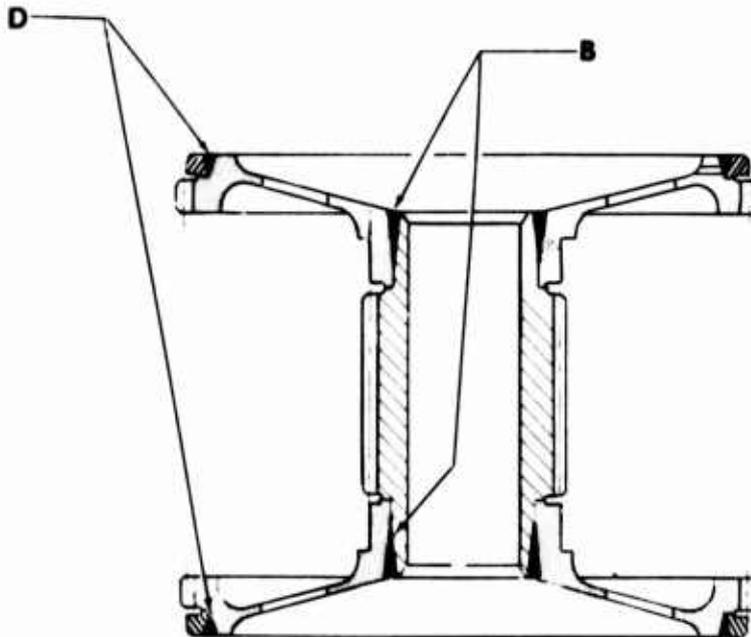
Assembled View of First-Row Pinion Showing Electron Beam Welds (Original Configuration).
